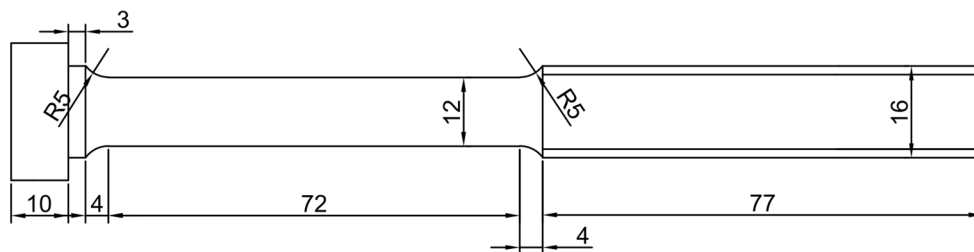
Dimensions of test specimens employed in uniaxial tension tests (material tests).
